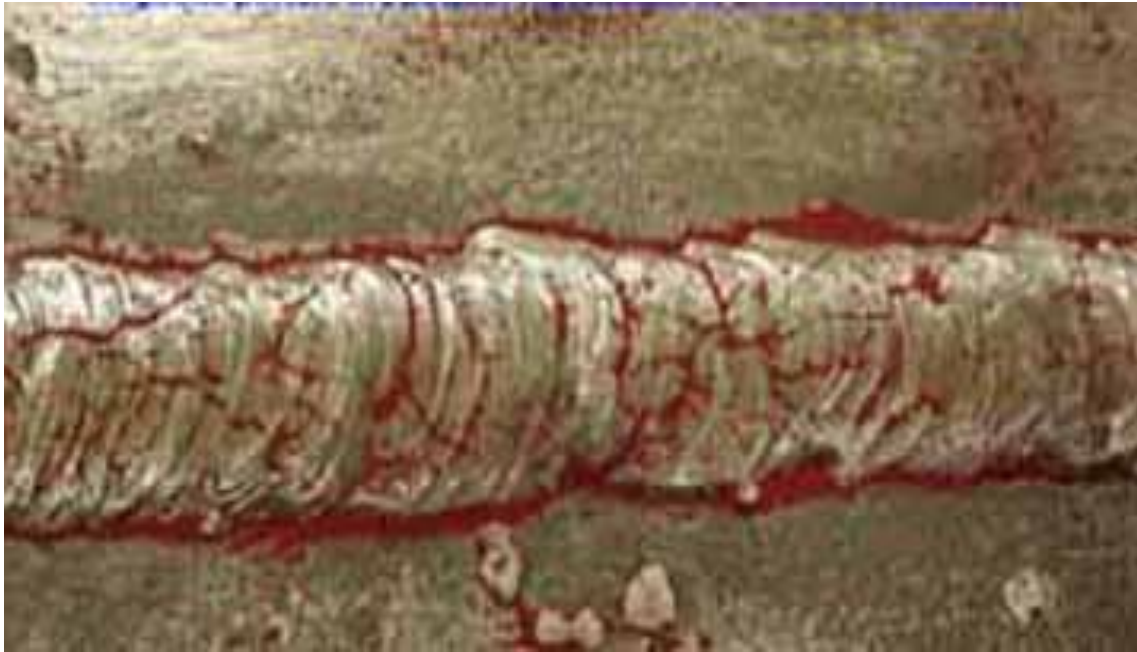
Corrosion defect in the aircraft Engine Compressor Section
